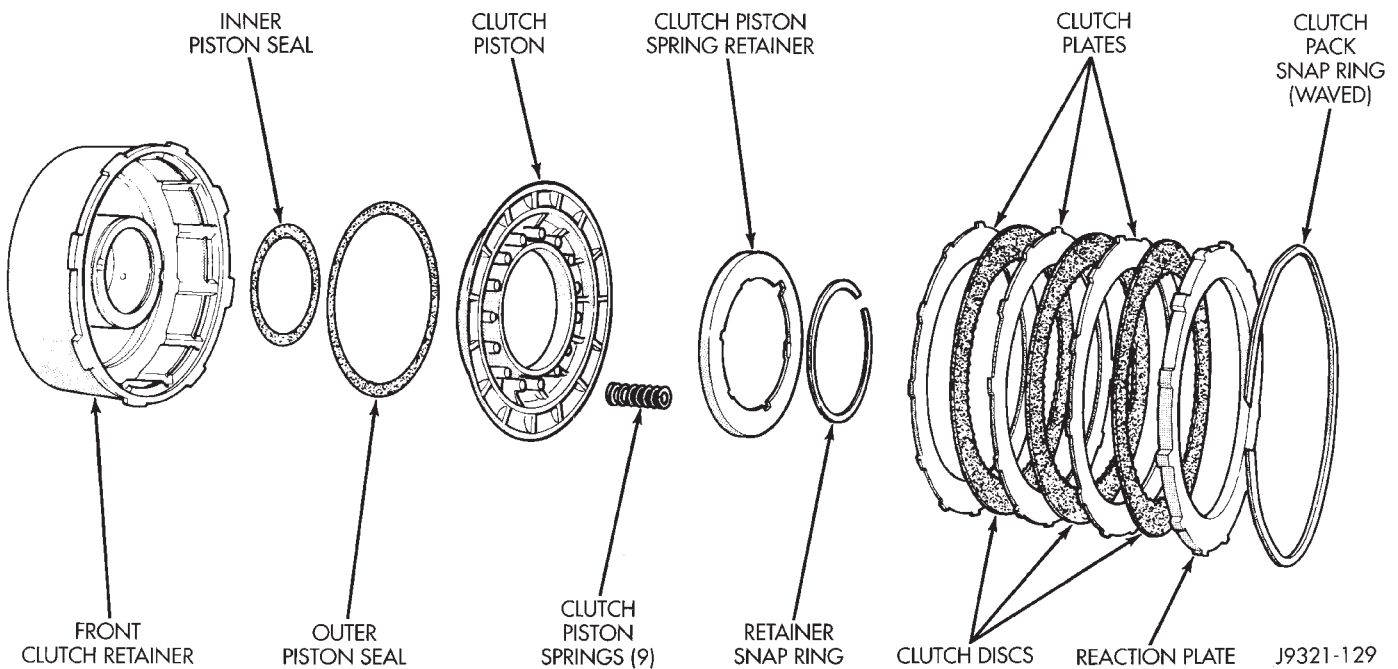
46RH Front Clutch Components (3-Disc Clutch Shown)
